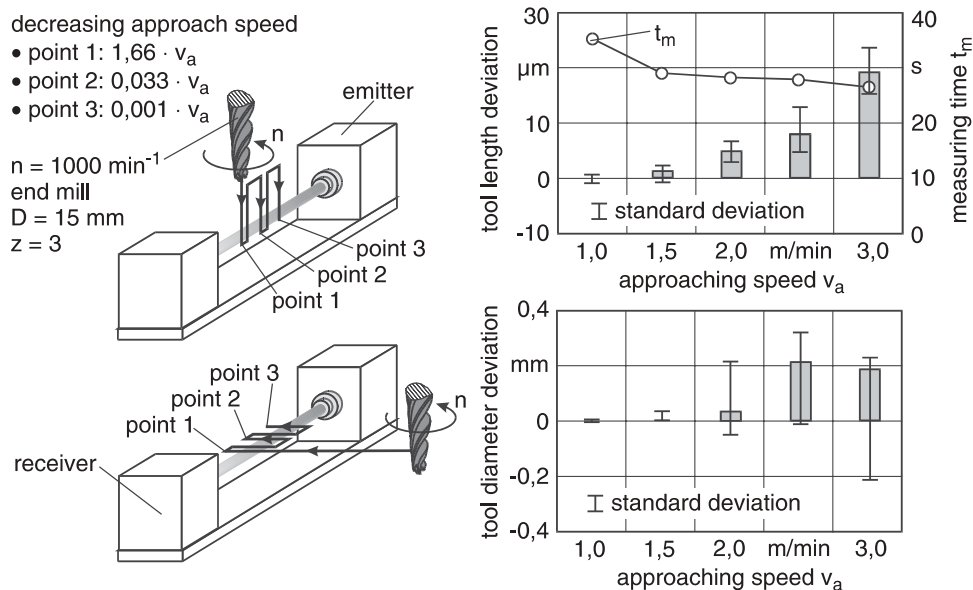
Tool measurement in a milling machine with a laser light barrier
